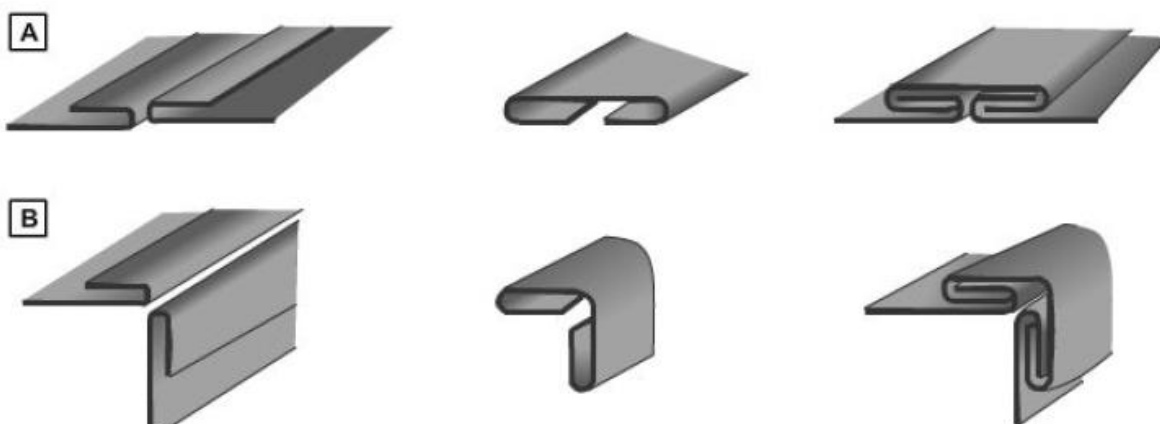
(A) Cap strip seam, (B) Locked corner seam.
